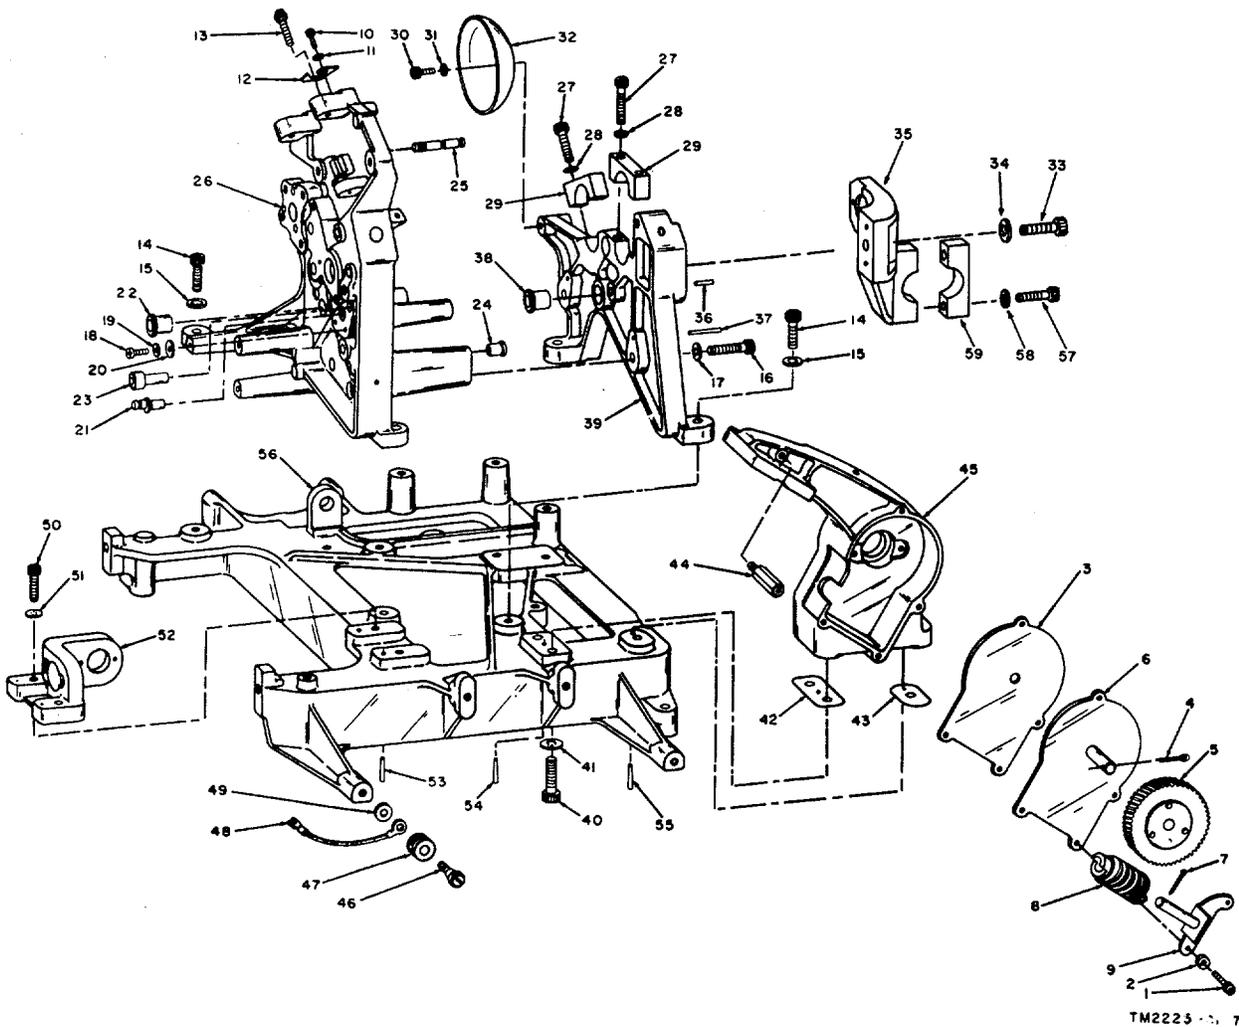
Reperfurator frame assembly (TT-76A/GGC, serial numbers 525 and above, on Order No. 49651-Phila-56 and subsequent procurements).
